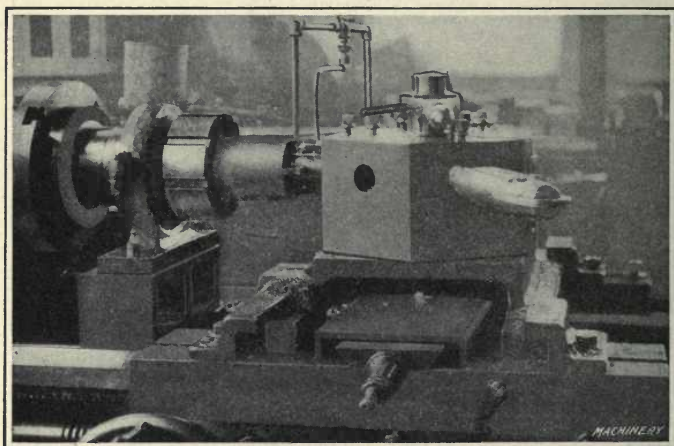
Finish-boring, reaming and facing 4.5-Inch Howitzer High-explosive Shell
